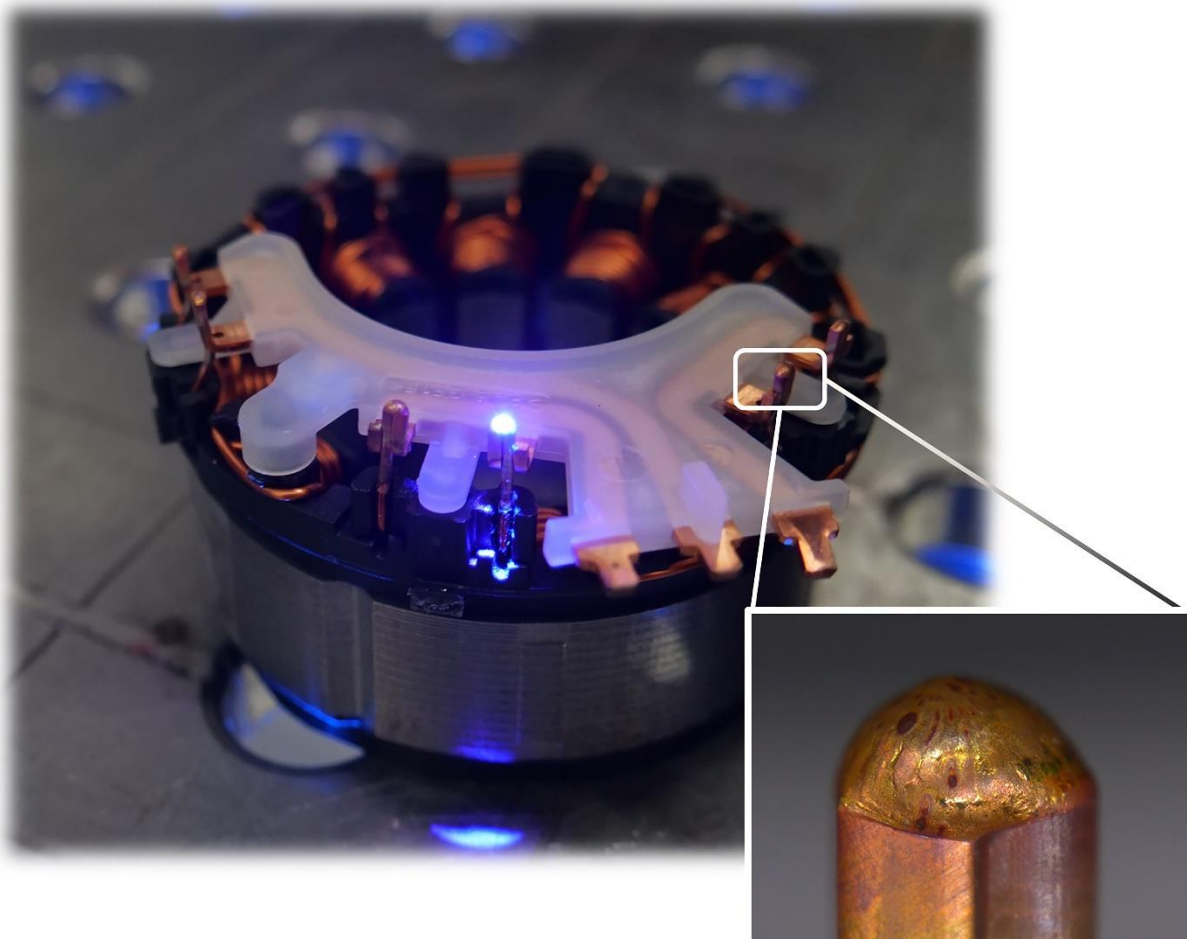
Installed Rotor with laser-welded hairpins © Laserline GmbH
